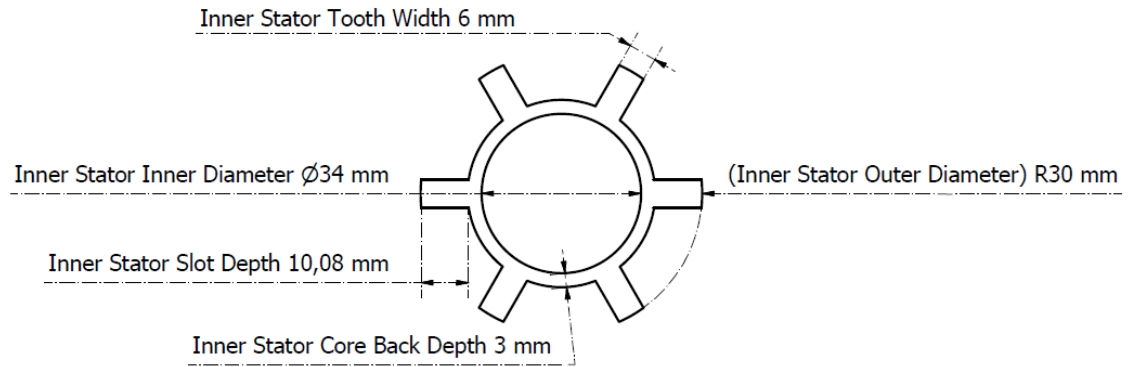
Inner Stator Dimensions of the New Modified Flux Concentrated Split Tooth PM Machine.
